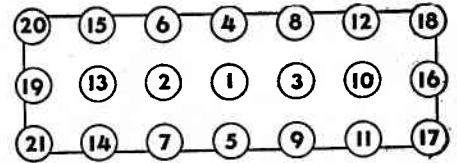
Six cylinder head tightening. 1953-55 L-Head
